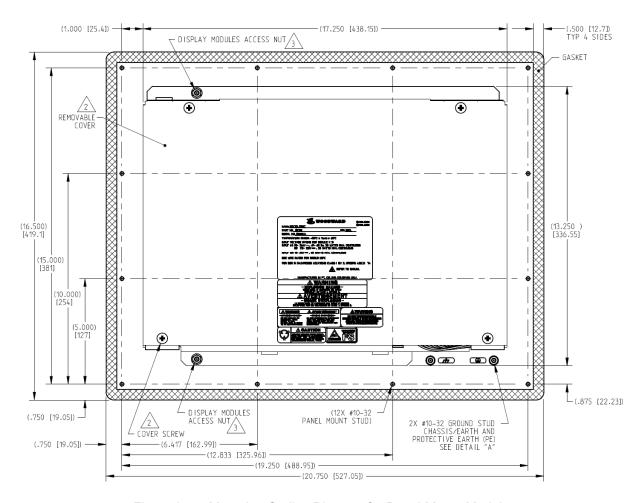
Mounting Outline Diagram for Panel-Mount Models
